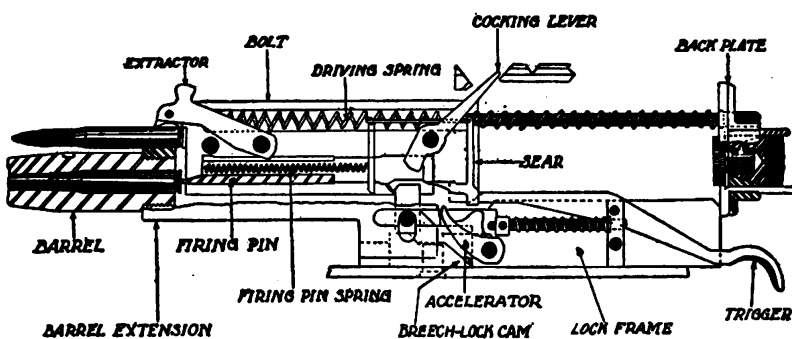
Caliber .30 machine gun—moving parts in forward position.
